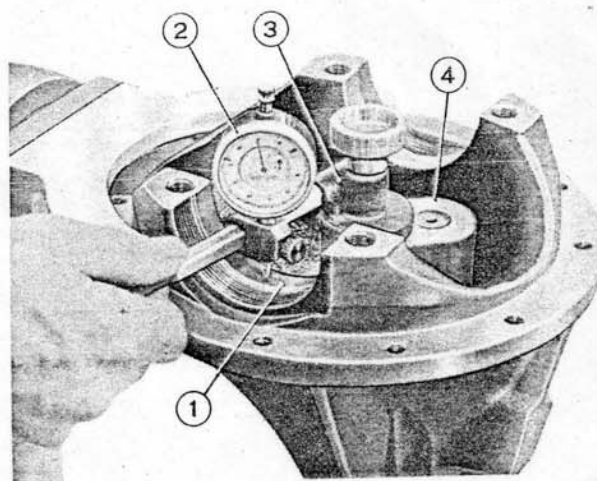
Determining the thickness of bevel pinion thrust washer.
